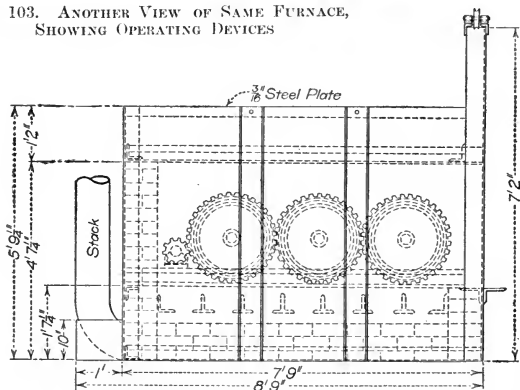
SIDE ELEVATION OF THREE-DRUM COKE BURNING FURNACE
